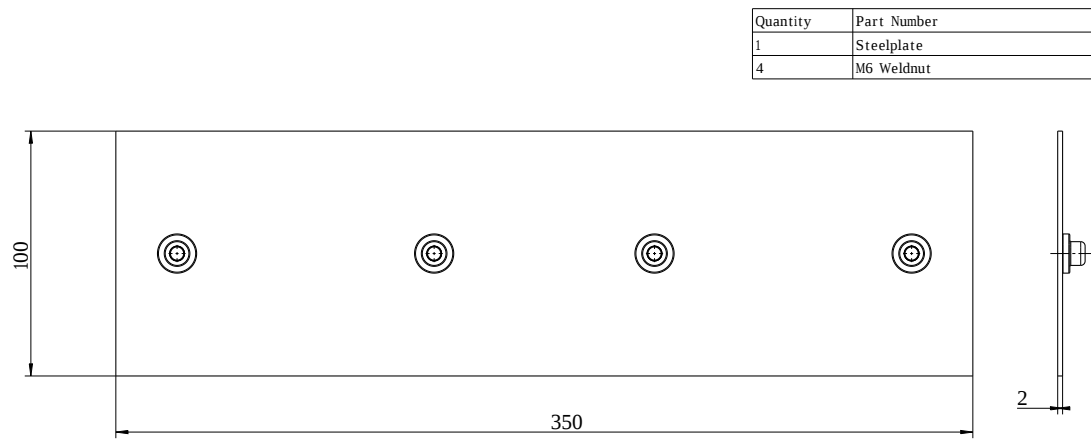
Custom made steel plate with 4 M6 welding nuts
